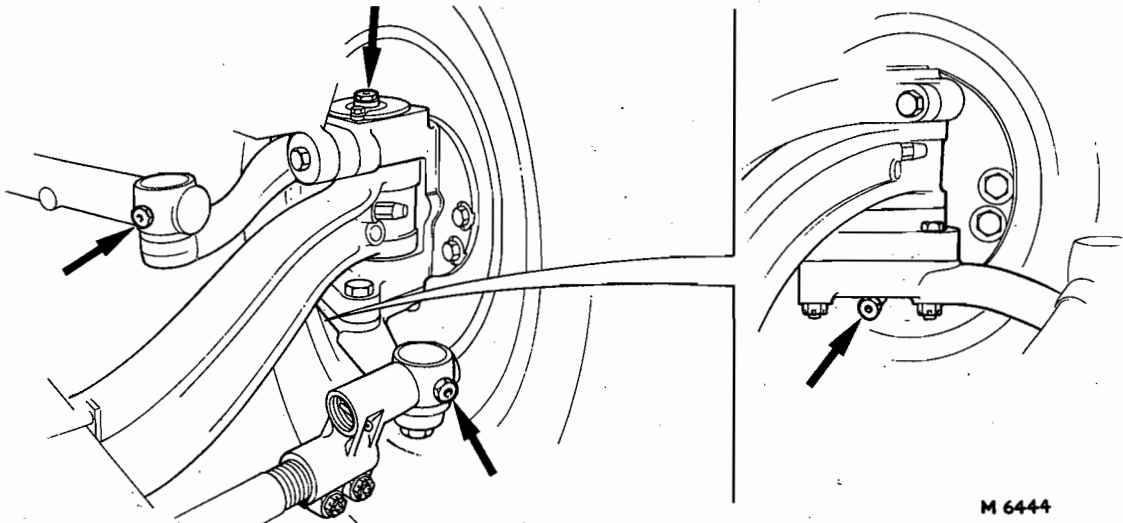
KING PIN AND STEERING BALL JOINT LUBRICATORS
